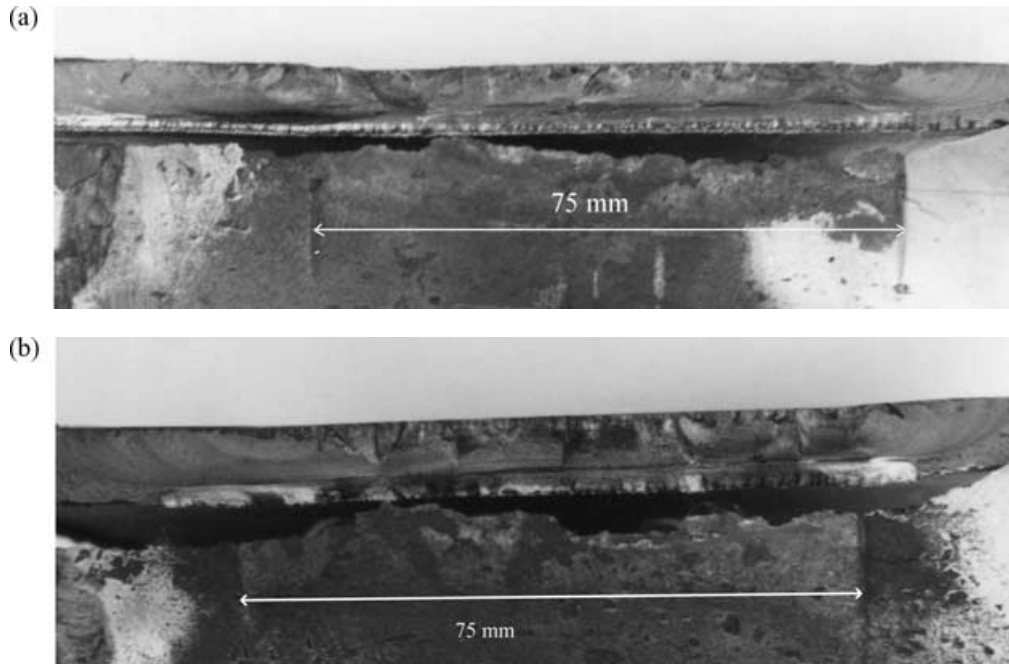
Fracture surfaces of the two indenters after test 7.
